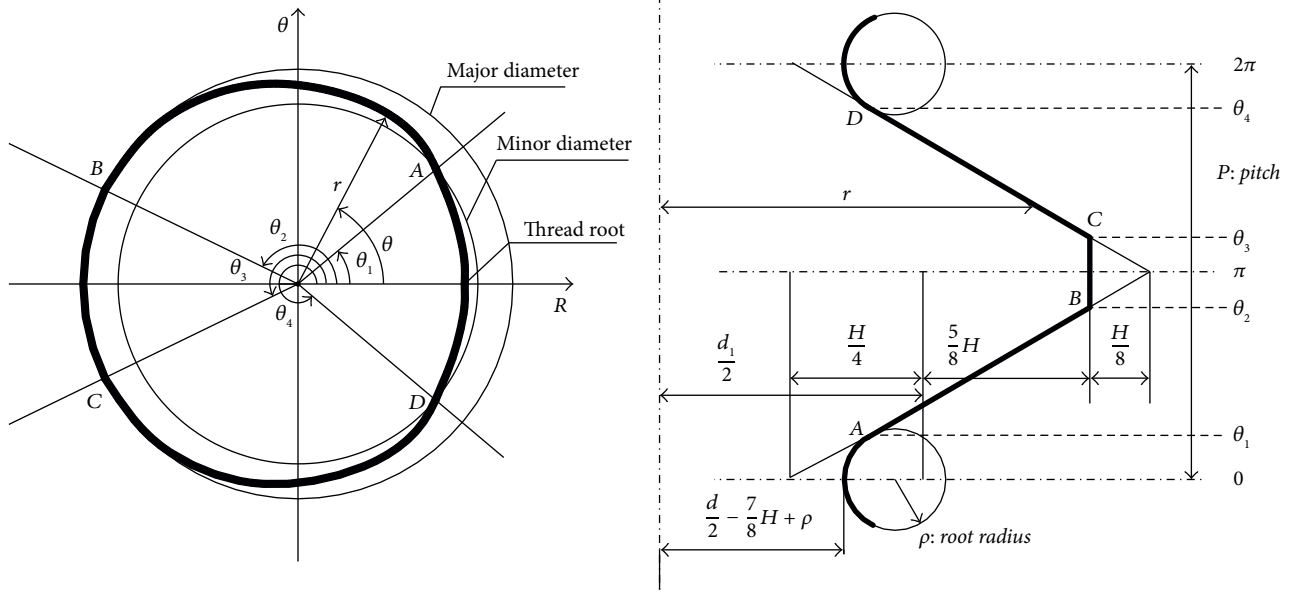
The section profile of the external thread and along the bolt axis [34].
